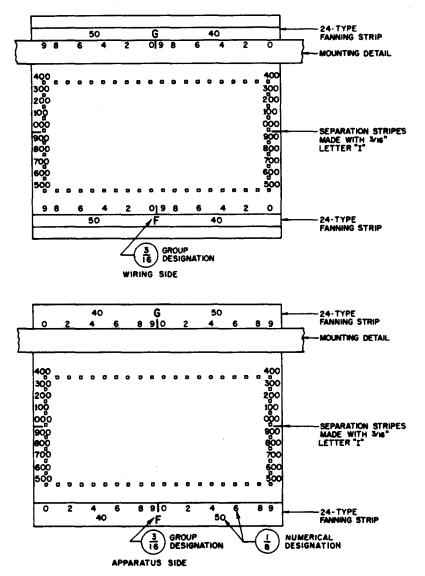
Terminal Strips—251 and Similar Types Using 24-Type Fanning Strips
